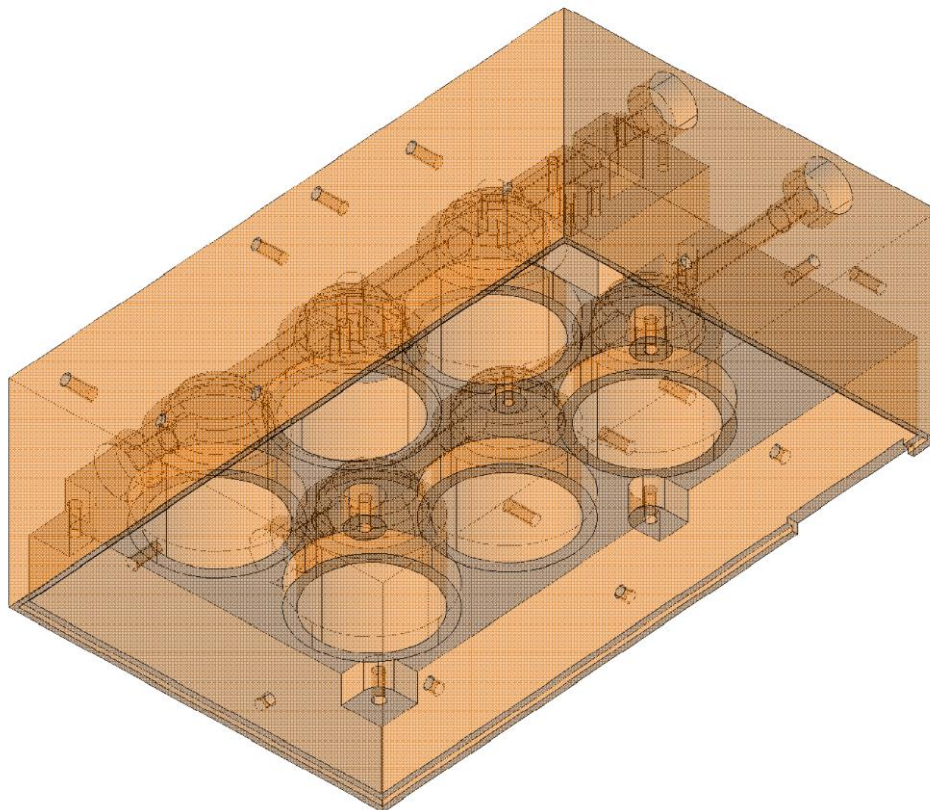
Bottom 3D view of the manifold showing the sensor hangars.
